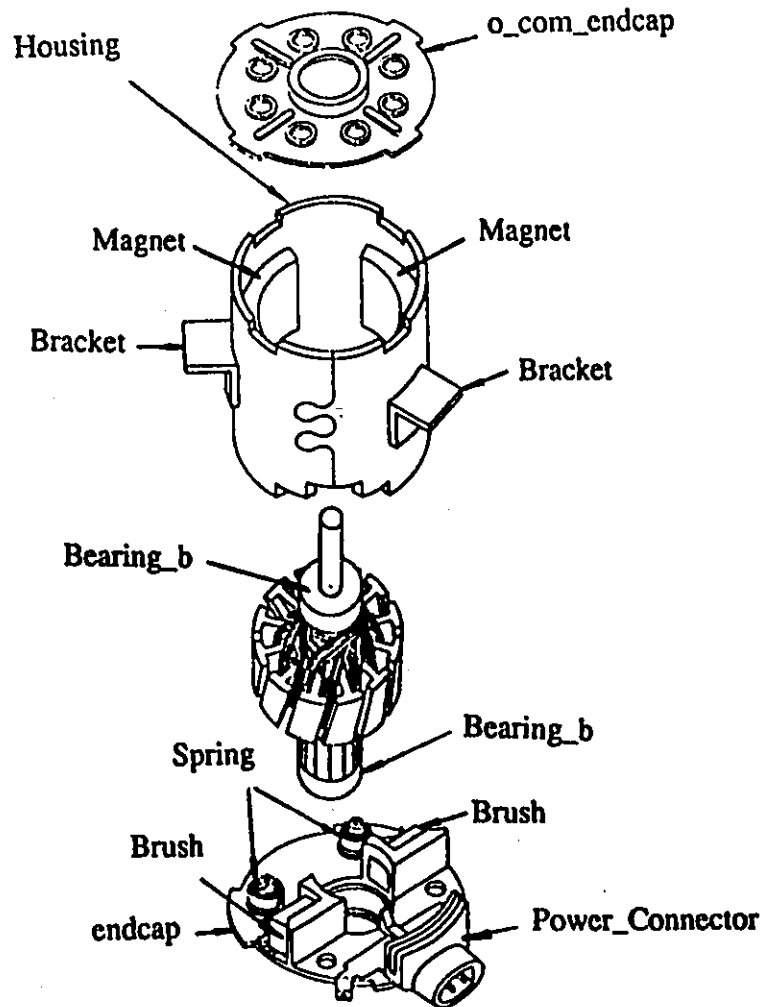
D.C. Motor Assembly (ElMaraghy et al., 1988)
